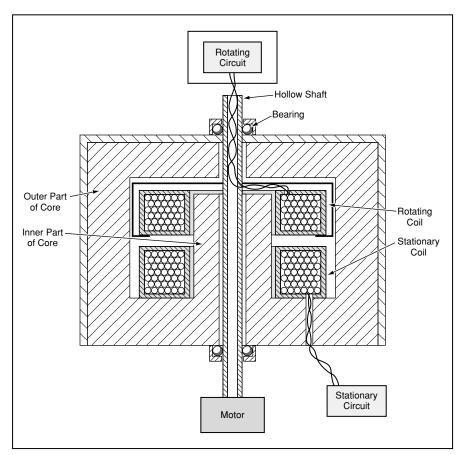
This Inductive Rotary Coupling resembles a conventional stationary transformer, except that one coil rotates with a shaft that passes through the middle, and the core is shaped to accommodate the rotating parts. The hollow shaft accommodates the wires that connect the rotating coil with the rotating circuit at one end of the shaft.
